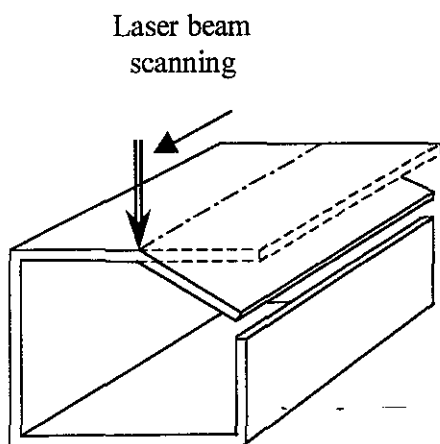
Example requiring convex forming (dash lines indicating the shape before laser forming)
